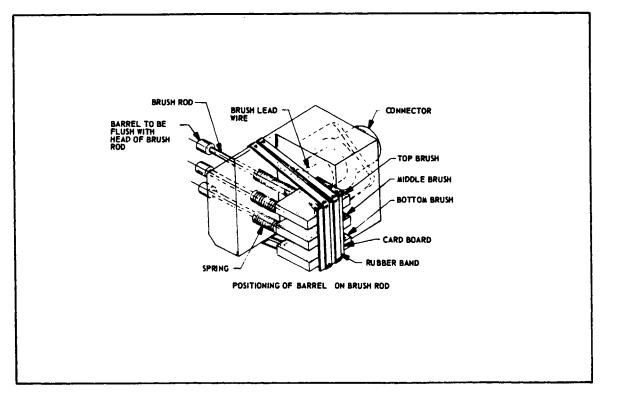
Holding Brushes for Soldering, PA-23-250 (six place), Serial Nos. 27-2505 and up
